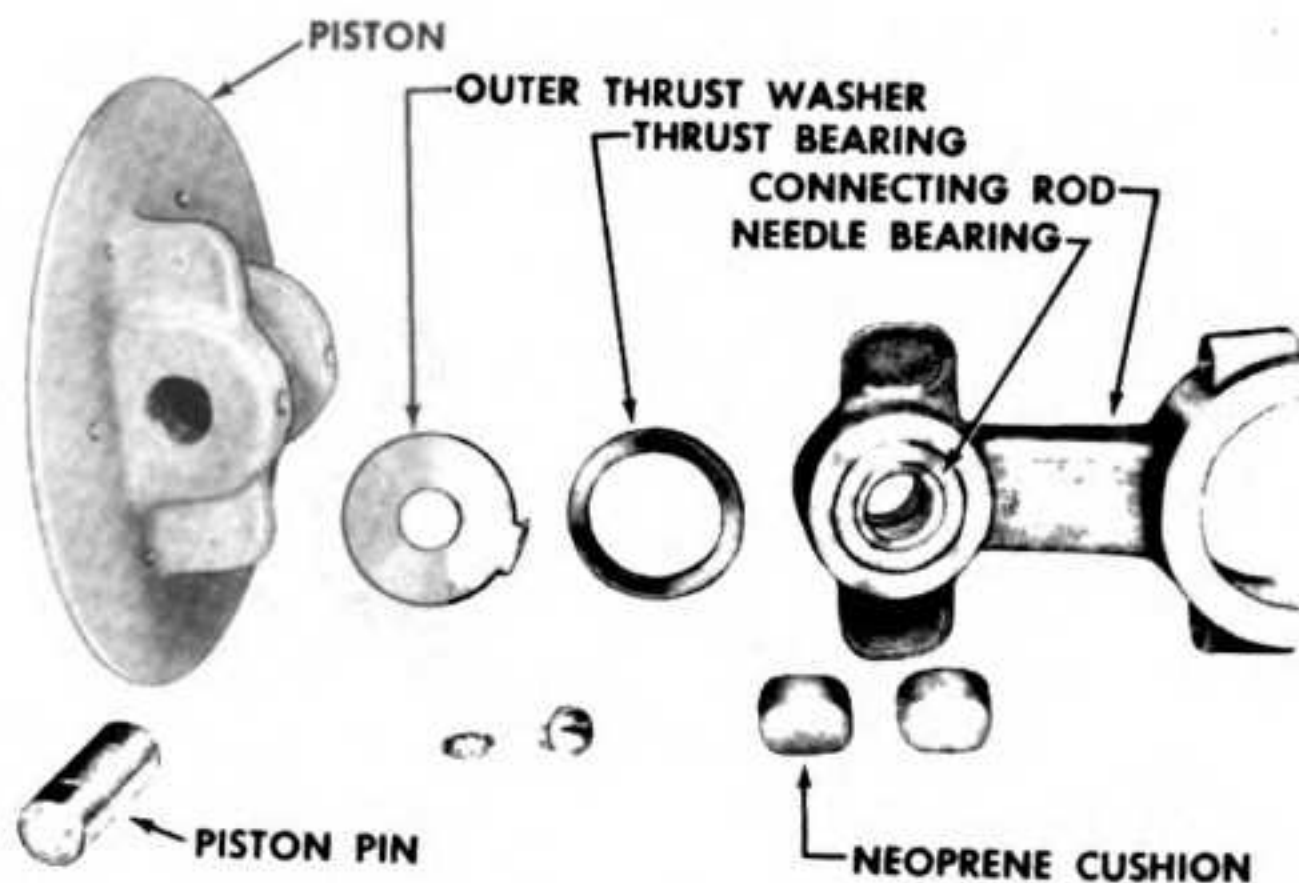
Compressor Piston and Connecting Rod, Disassembled
